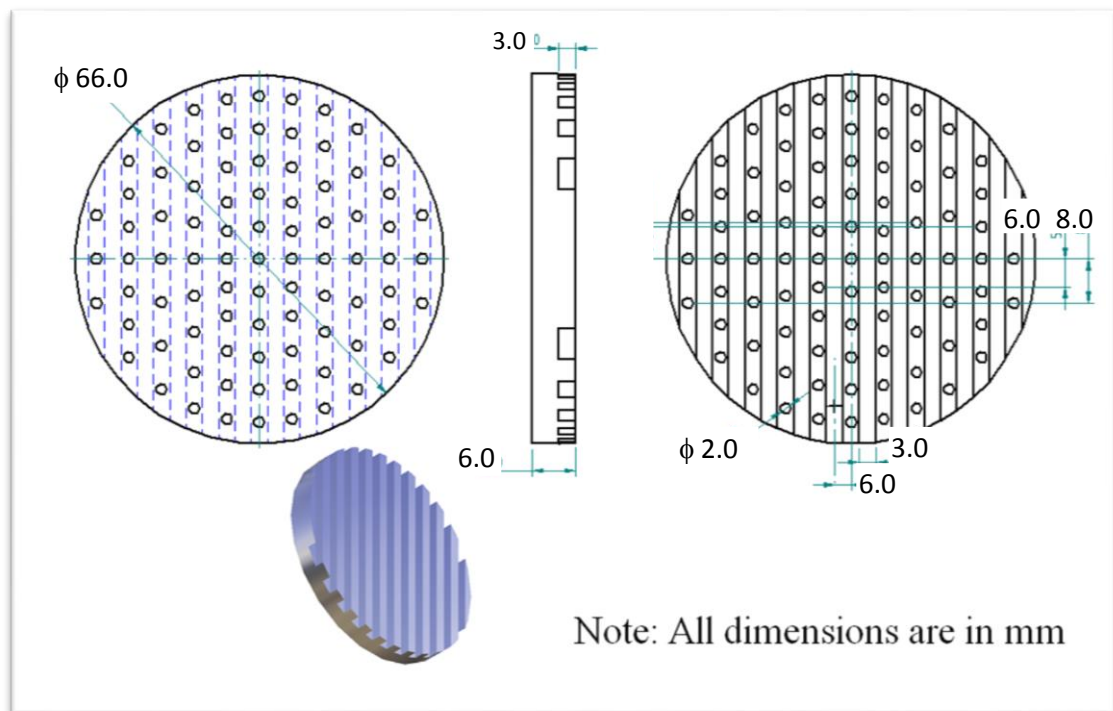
The mechanical drawings of the grooved spacers used with the modified stress controllable pressure plate cell.
